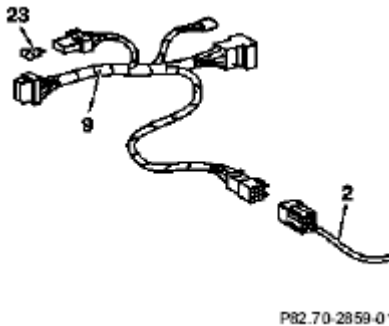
Identifying Portable CTETL Wiring Harness And Components
